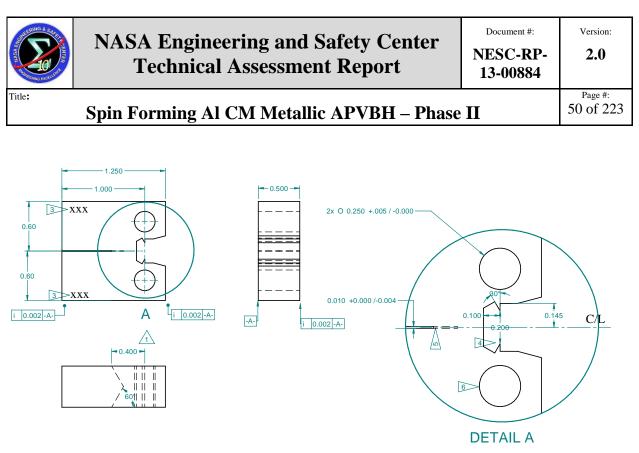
J<sub>IC</sub> Fracture Toughness Specimen Design; L-T and T-L Orientations. Drawing No. S-295. All dimensions are in inches.
